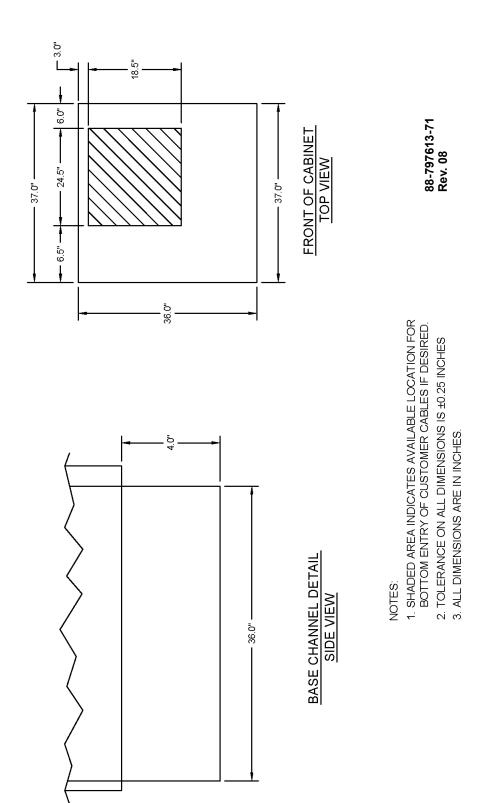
Outline drawing, System Control Cabinet (SCCT), 1600-2000A
